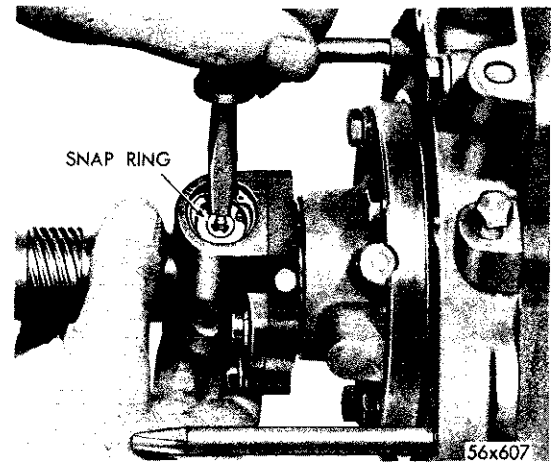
Removal and Installation of Governor Valve Shaft Snap Ring
